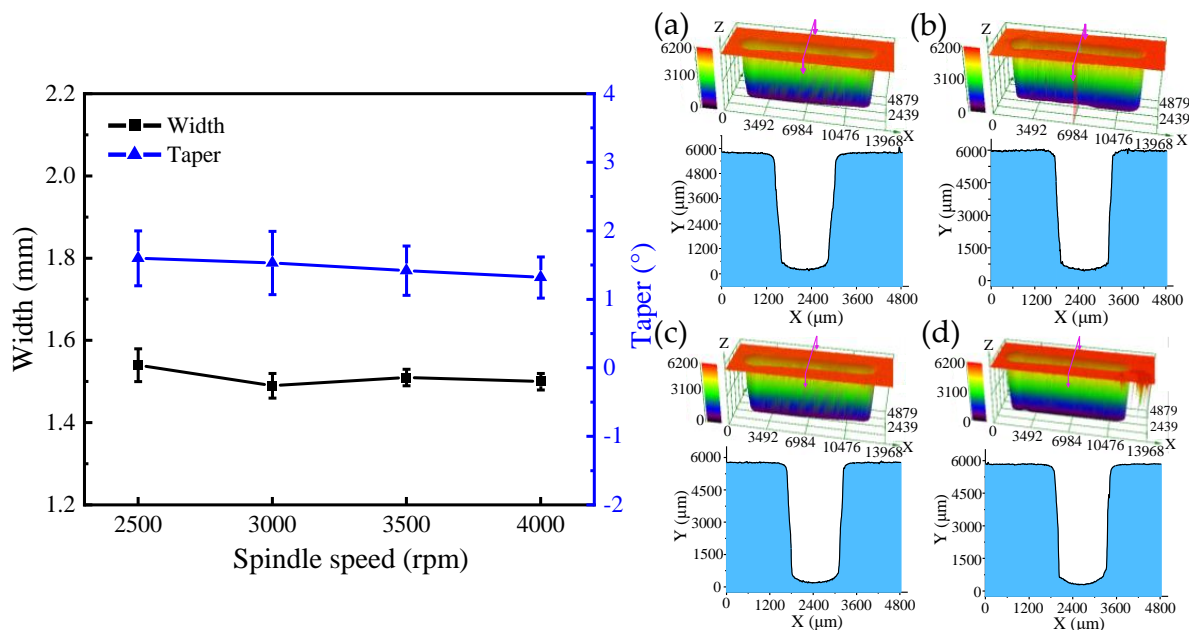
The dimension and 3D profile of DNGs milled with different spindle speeds: (a) spindle speed = 2500 rpm; (b) spindle speed = 3000 rpm; (c) spindle speed = 3500 rpm; and (d) spindle speed = 4000 rpm.
